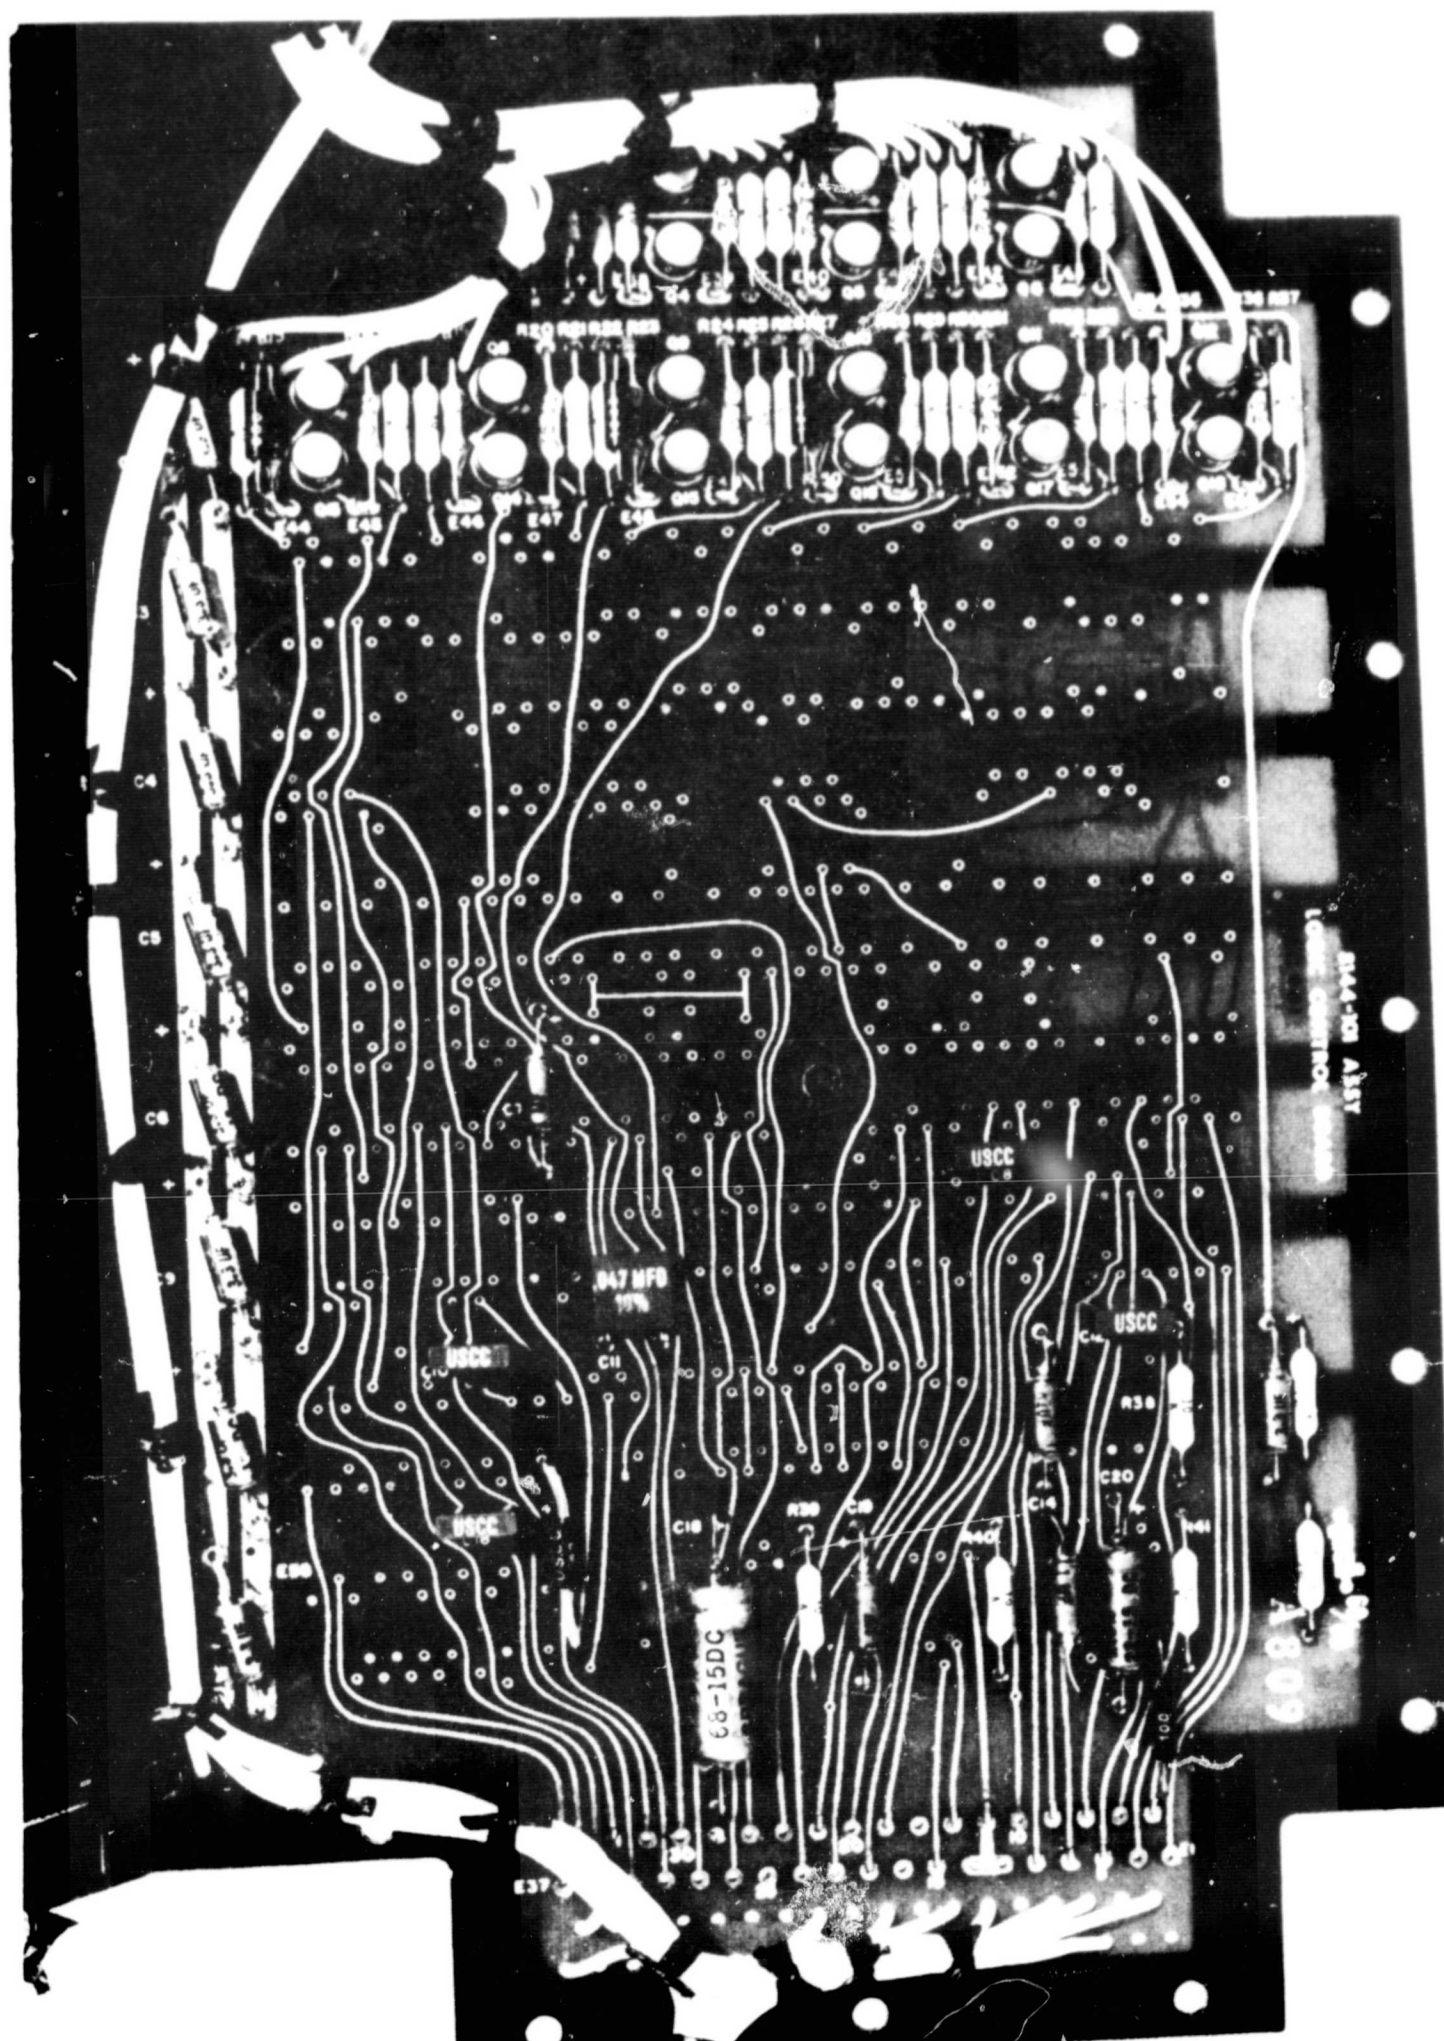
MULTILAYER PRINTED CIRCUIT BOARD, CIRCUIT SIDE.
